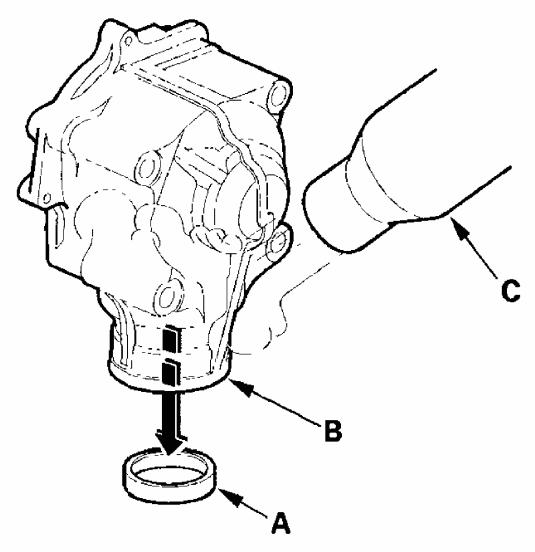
Removing Tapered Roller Bearing Outer Race From Transfer Housing Courtesy of AMERICAN HONDA MOTOR CO., INC.
